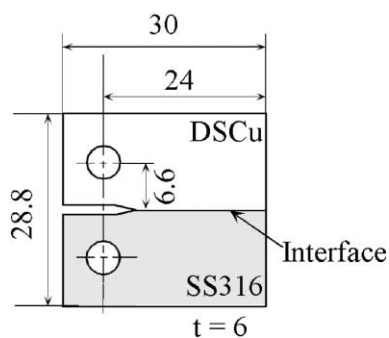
Dimensions of test specimen of fatigue crack propagation test.
